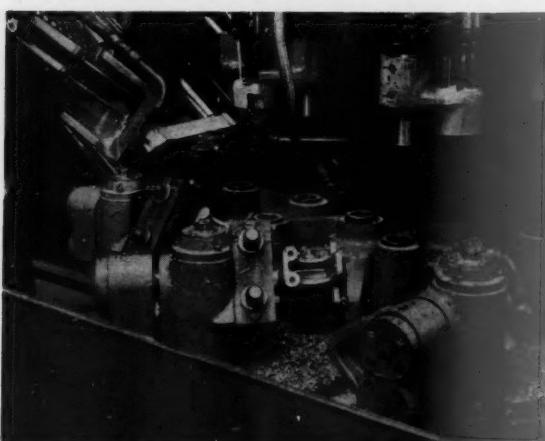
The work-holding and locating fixtures on the machine illustrated in Fig. 12
